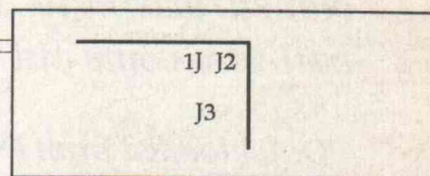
The upper right-hand corner of the Model 102 printed circuit board.
